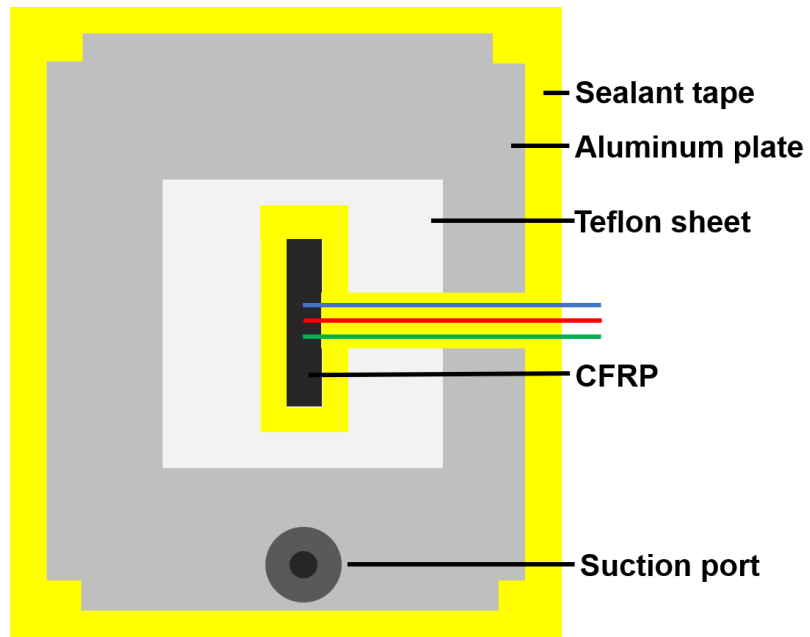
Setting CFRP specimen on molding plate with vacuum bagging
